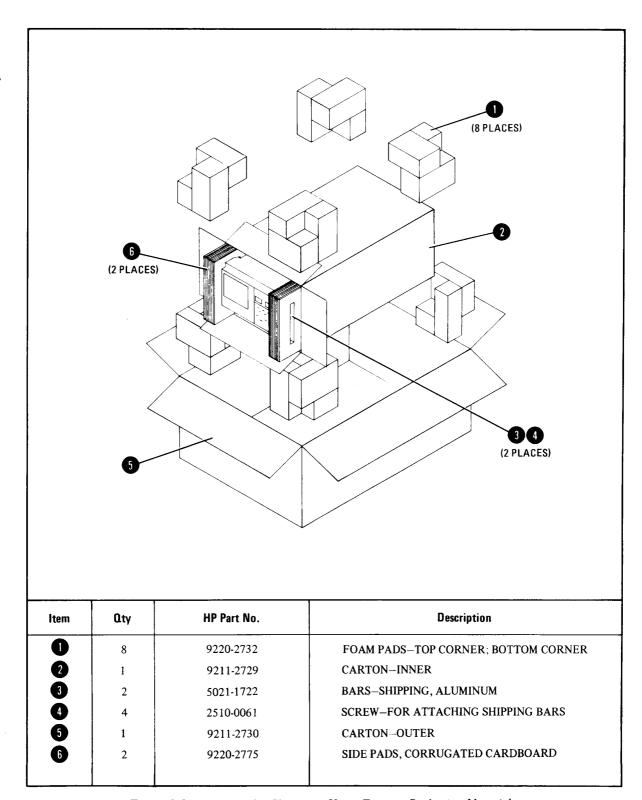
Packaging for Shipment Using Factory Packaging Materials
